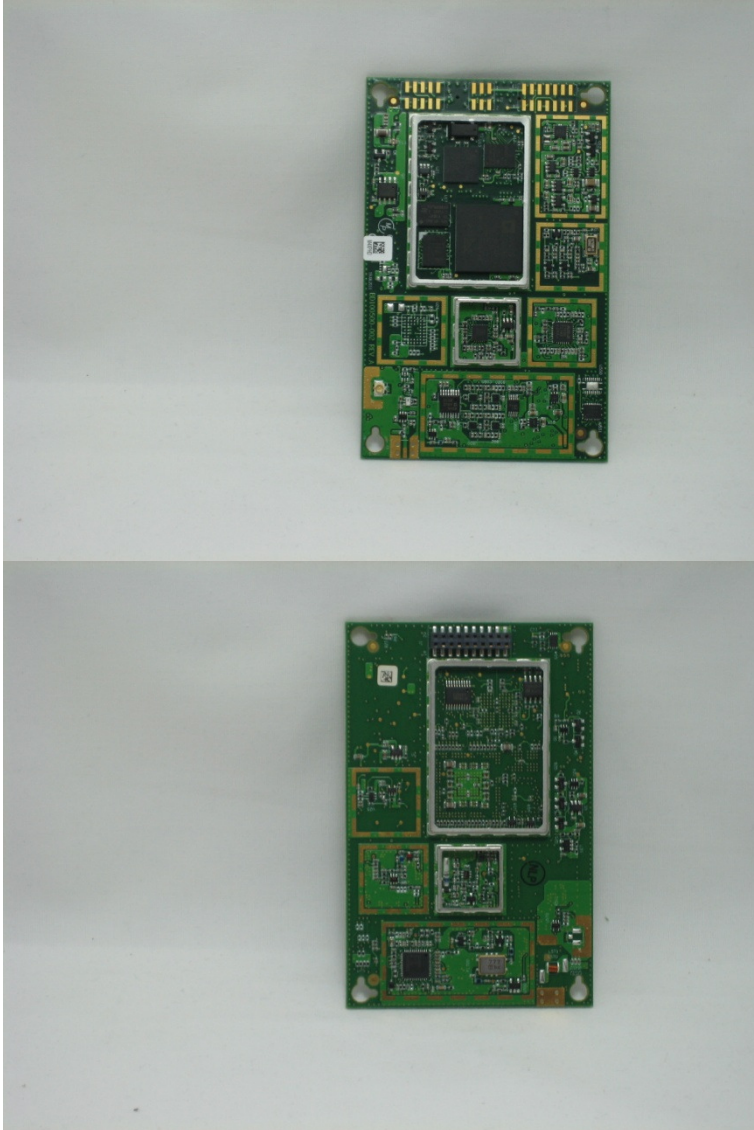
IDP-680 Modem Card - Top and Bottom View (no shields)
